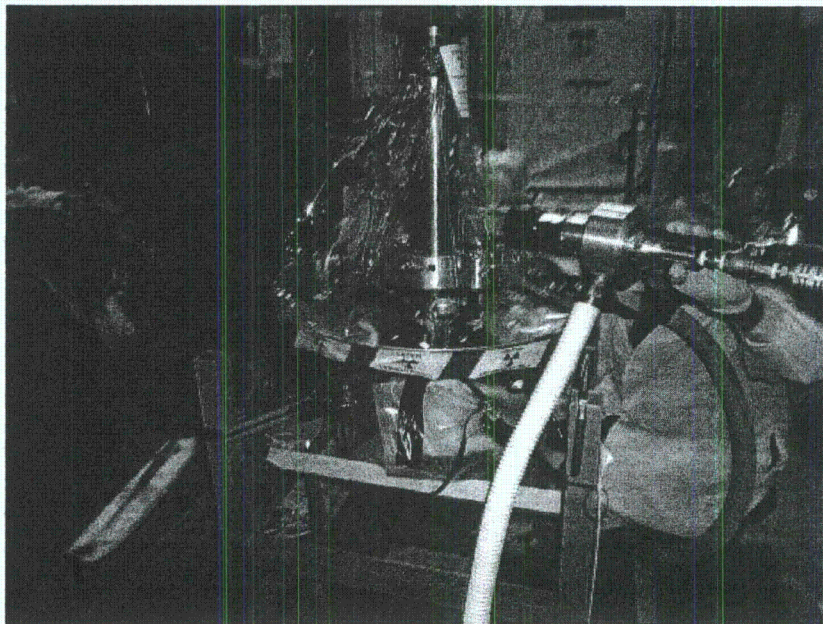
Cutting of Nozzle 63 Penetration Tube
